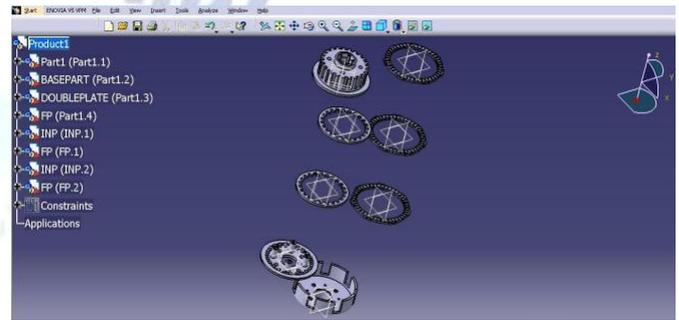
D representation of Exploded View of Wet Multi-plate Clutch.
